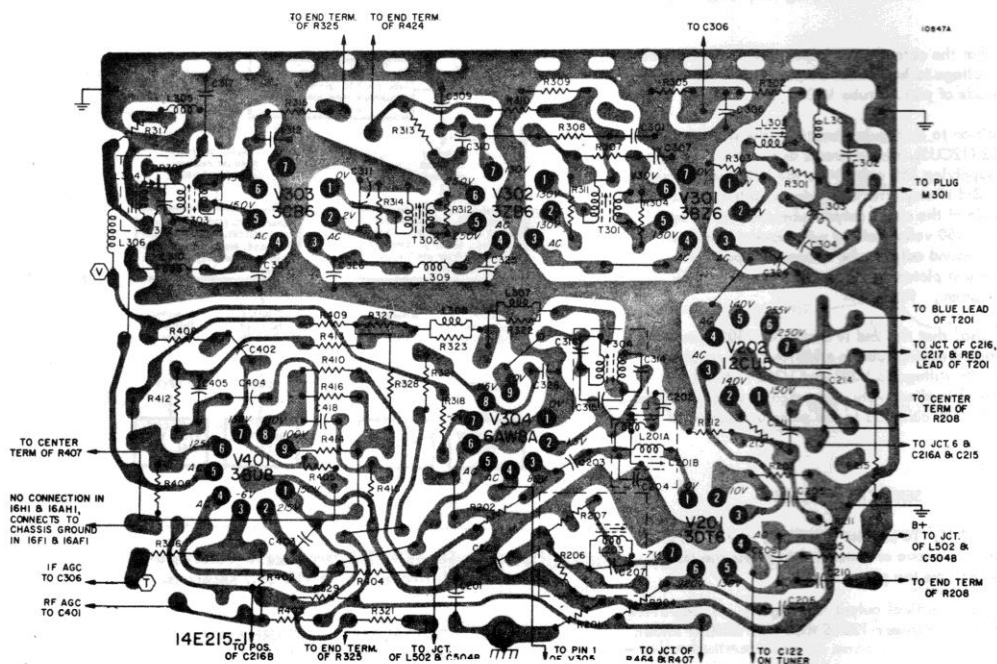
View of Wiring Side of Printed Wiring Board. Gray area represents printed wiring; black symbols and lines represent components and connections on opposite side.
